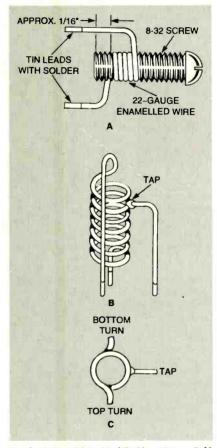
Making L1 is simplified by using an 8-32 screw as a winding form (A). Be sure the screw is steel instead of brass, or you might solder the coil to the screw when attaching the tap (B). After the coil is installed in the PC board and the screw removed, it should look like (C) when viewed from overhead.
